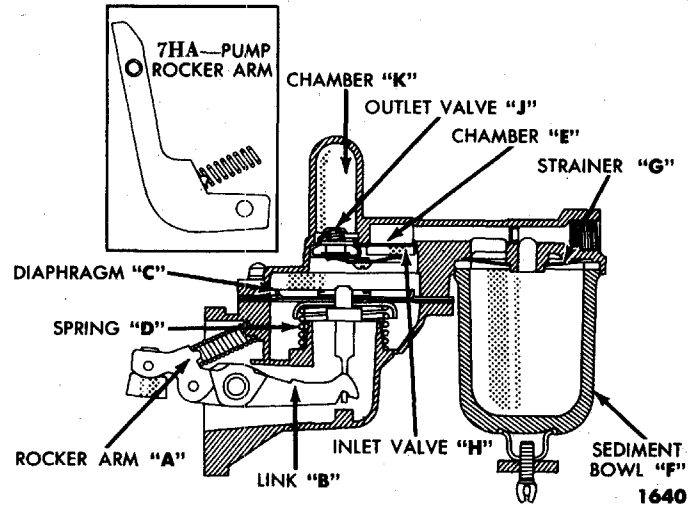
Cross Section of 8-Cylinder Engine Fuel Pump
